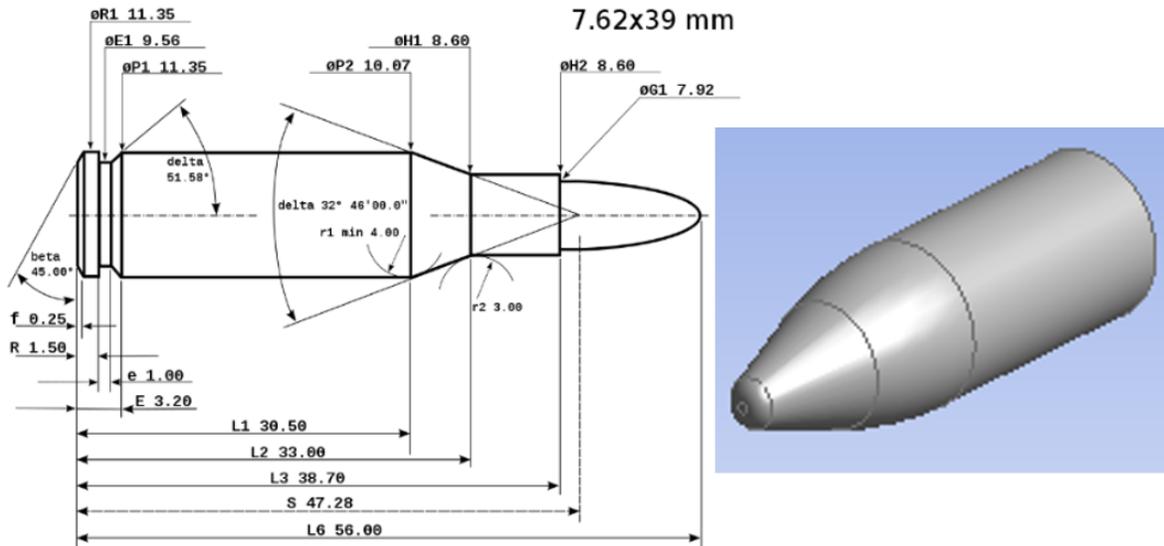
Dimension and corresponding CAD model of ak47 bullet core.
